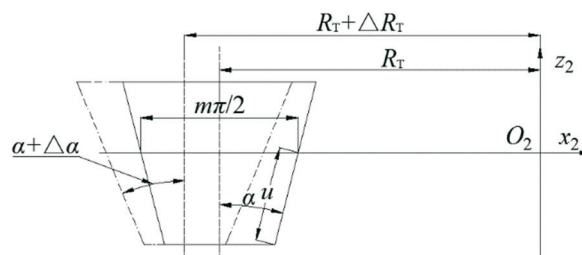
Cutter geometry error of VH-CATT cylindrical gear
